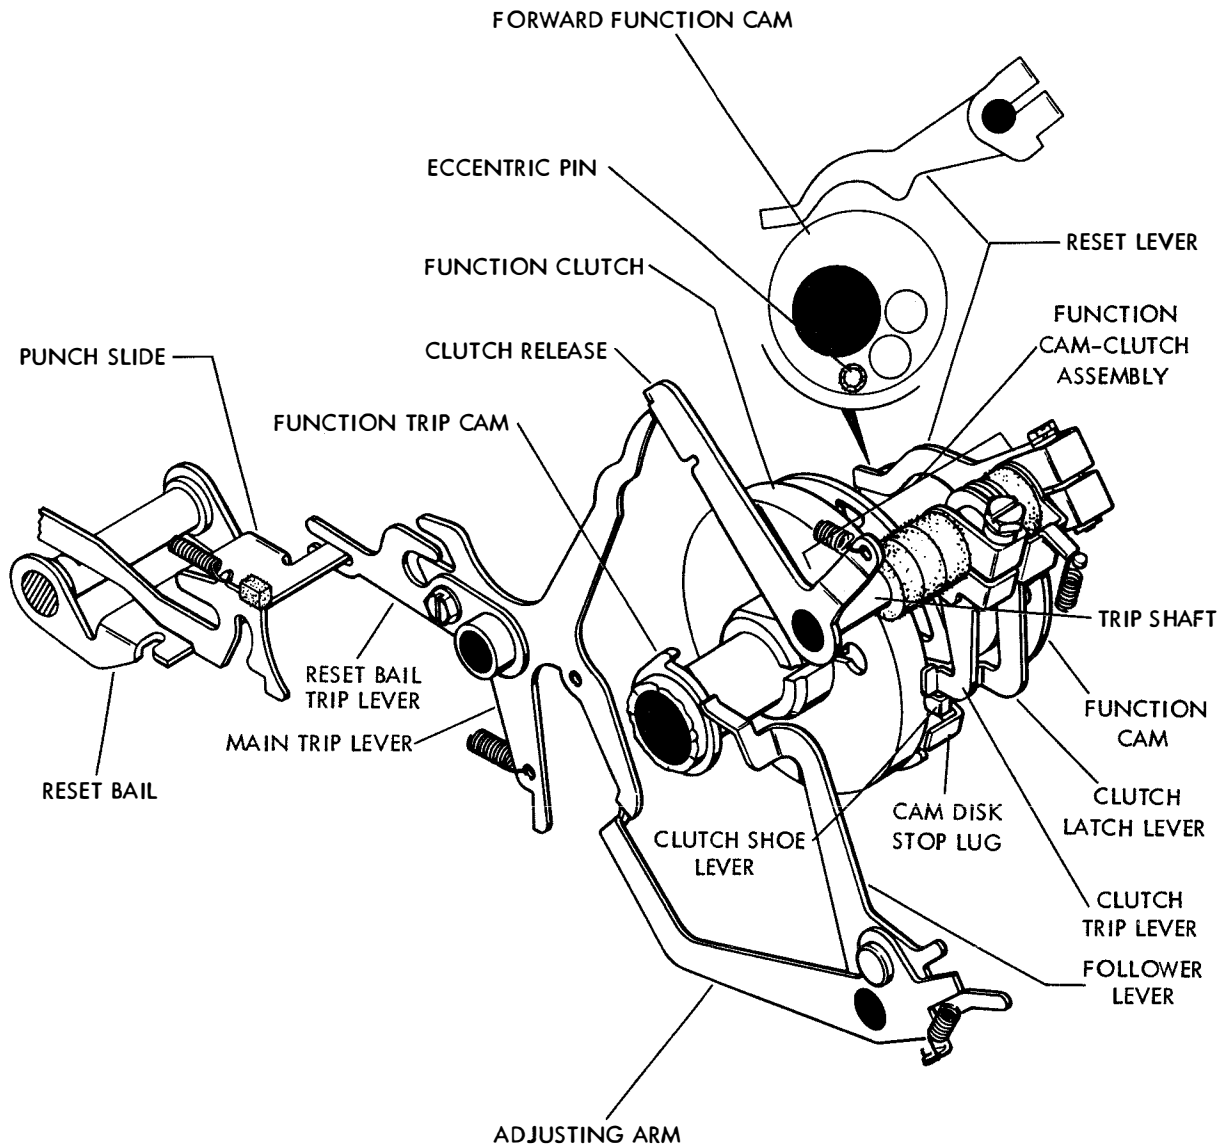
Function Cam-Clutch and Clutch Trip Assembly
